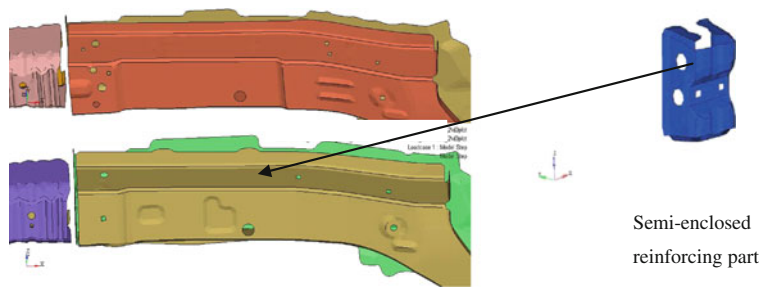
The right longitudinal beams design plan 2 (the above is plan 1)
